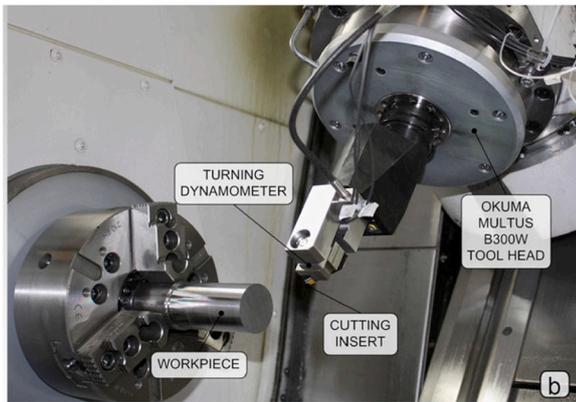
A piezoelectric force ring assembled on the turning tool holder [146].
